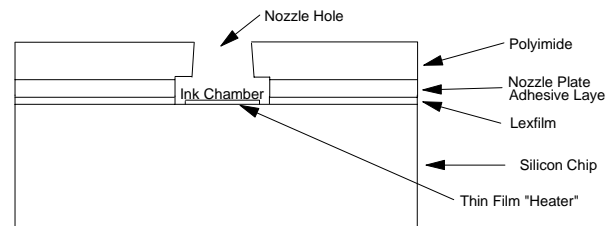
Cross section of 7000 series chip/nozzle plate assembly
